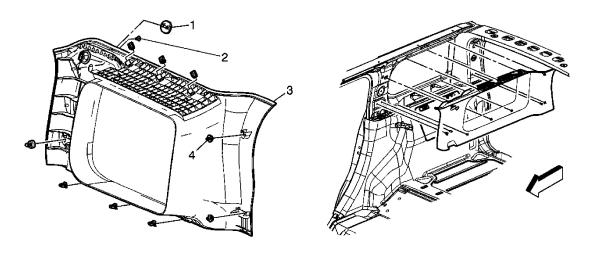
Body Side Rear Upper Garnish Molding Replacement Courtesy of GENERAL MOTORS CORP.
